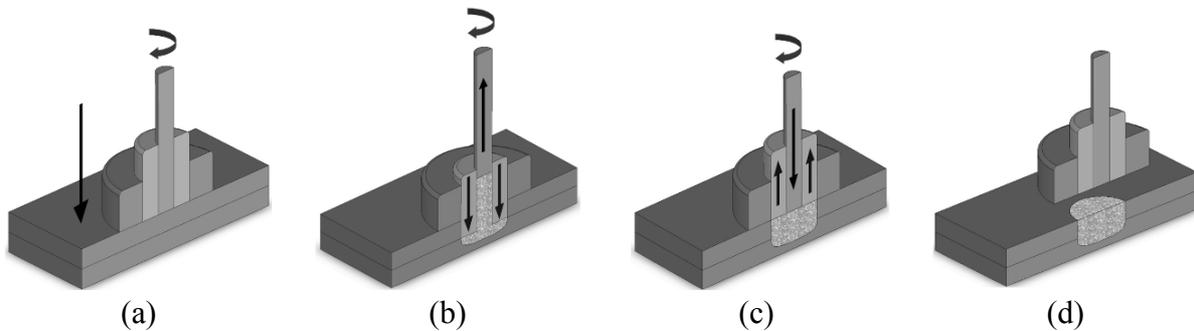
Schematic illustration of the FSpW sleeve plunge variant: (a) clamping and tool rotation, (b) sleeve plunging and pin retraction, (c) tool back to surface level and (d) tool removal.
